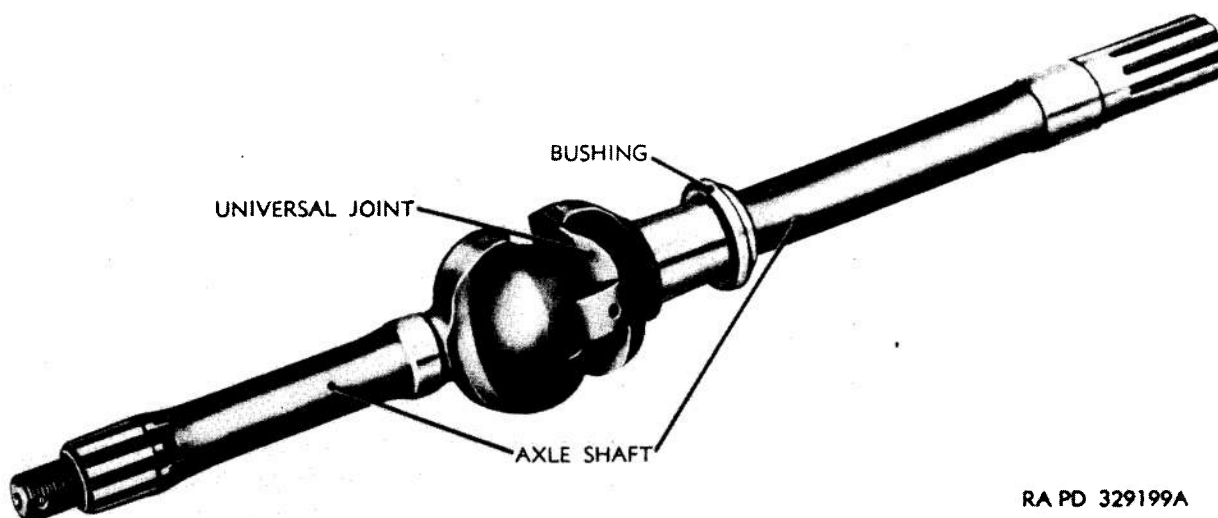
Tracta Constant Velocity Universal Joint—Assembled View
